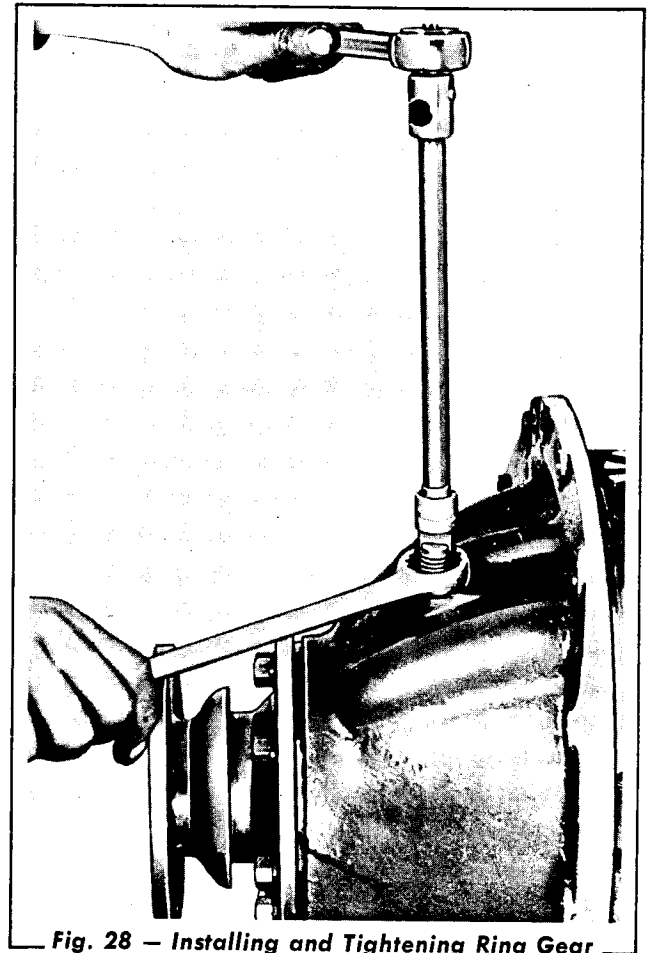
Installing and Tightening Ring Gear Thrust Block
